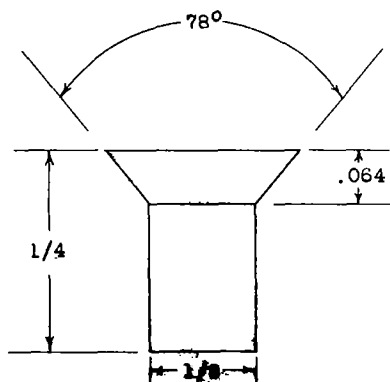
Dimensions of machine-countersunk rivet and angle of countersink used in riveting method C for 1/8-in. rivet.
